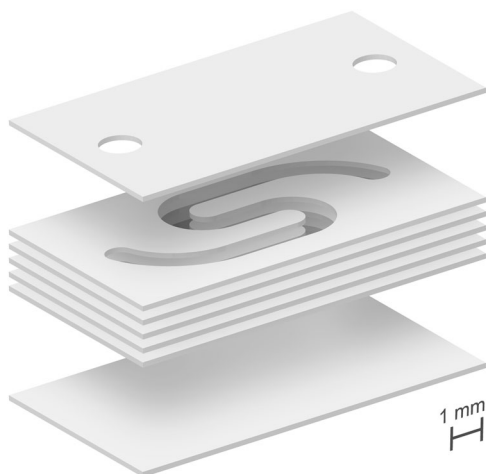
Exploded view of the microcomponent showing, bottom up: bottom layer, middle five layers containing the microcavity, and top layer containing fluidic inlet and outlet. Size before sintering.
